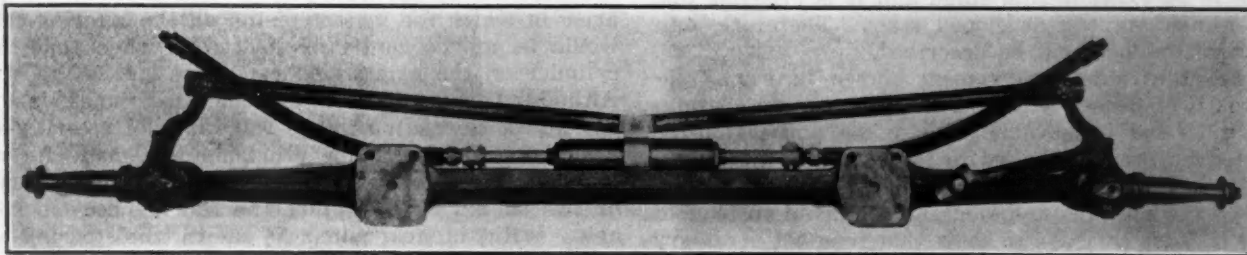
HYDRAULIC STEERING-MECHANISM ON FRONT AXLE
